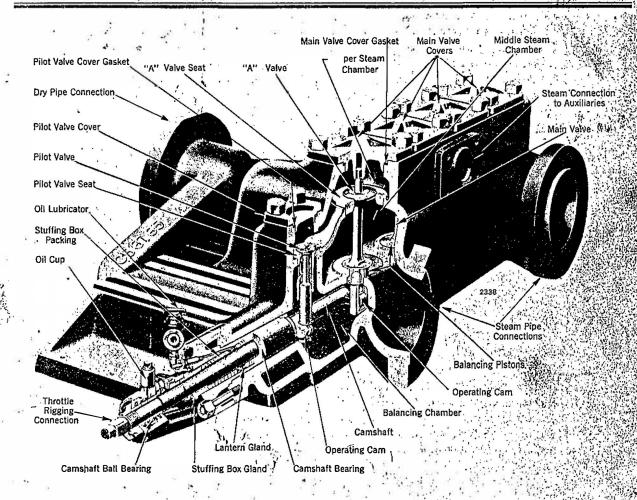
Perspective View of American Multiple-valve Throttle and Superheater Header
